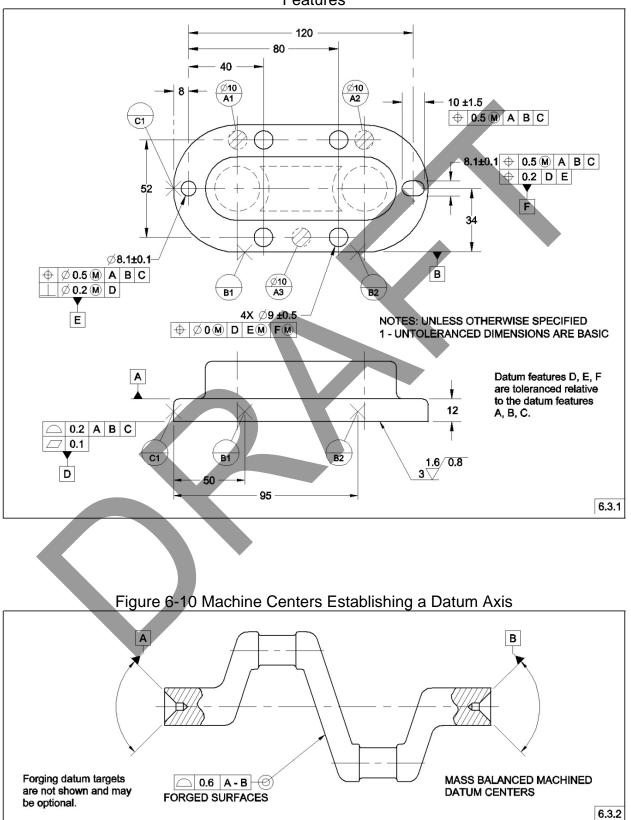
Machined Datum Features Located From Cast/Forged Molded Datum Features
